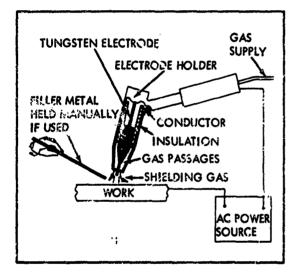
Schematic Diagram of Equipment for Inert Gas Tungsten Arc Welding
